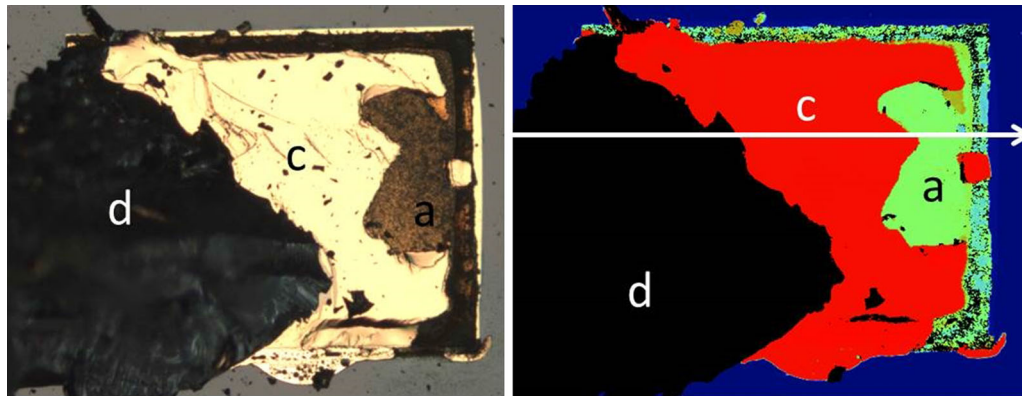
Fracture surfaces on a sample sheared at room temperature. Three fracture modes are visible: interface fracture in Cu_3Sn layer (a), adhesive fracture at Ti-W layer, (c) and cohesive fracture in the Si die (d).
